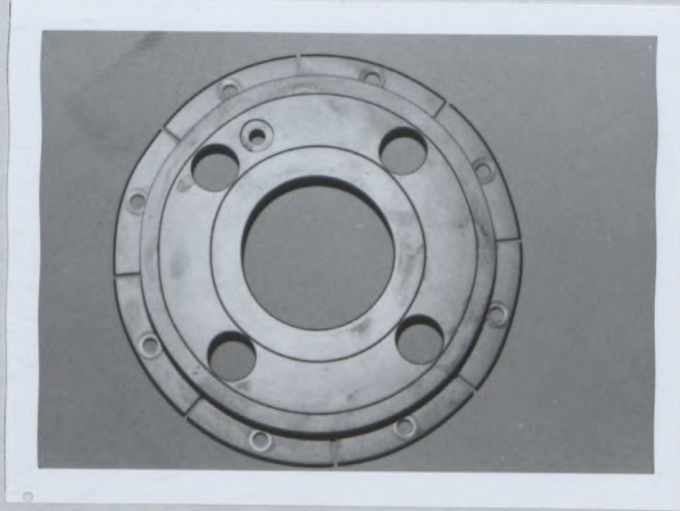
BRAKE BELL, FRONT AND REAR, TYPE D
